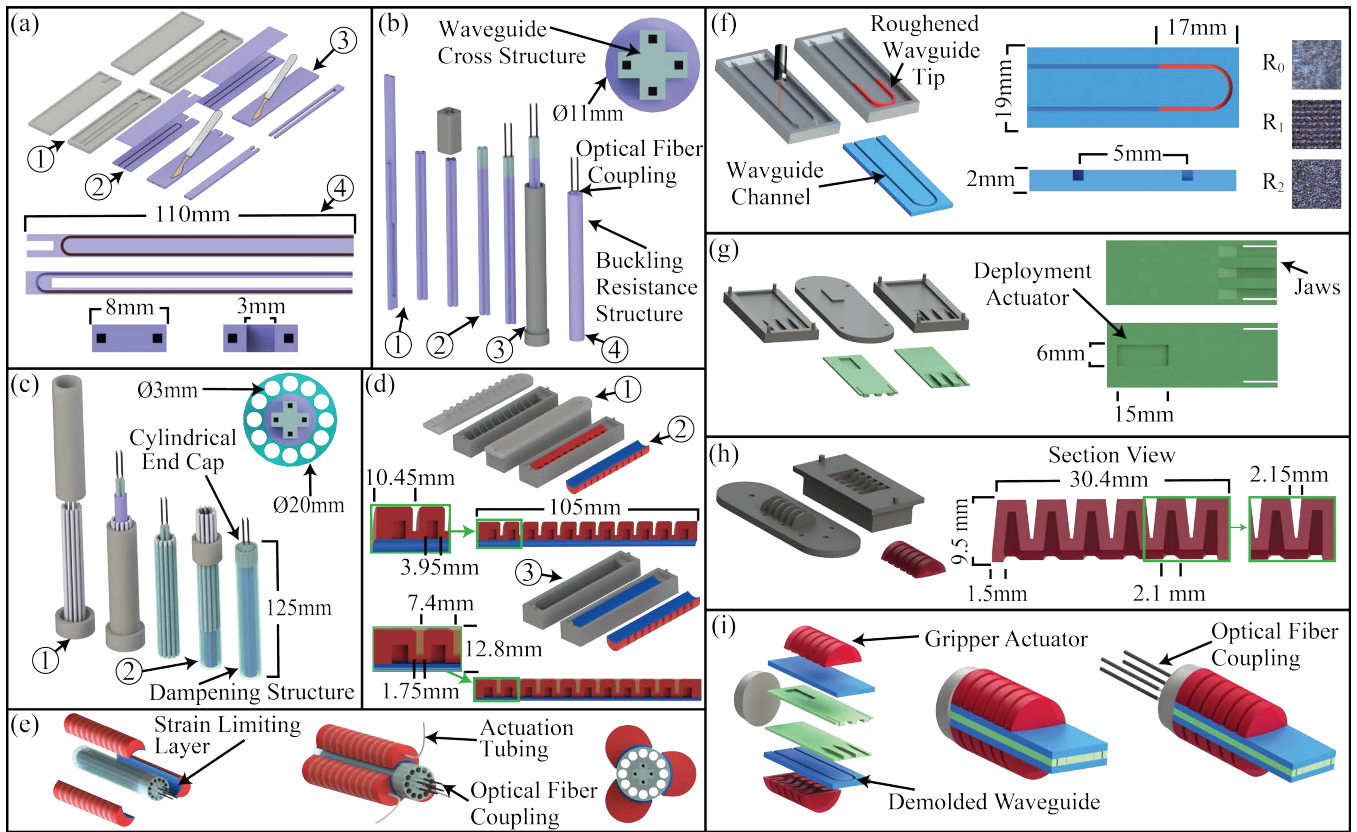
Soft robot fabrication. Robot module fabrication (a-e) and gripper fabrication (f-i). a) WGs embedded in the cross structure of the robot module. b) Cross structure assembly and molding into a cylindrical shape. c) Dampening structure around the sensing core. d) Pneumatic actuators molding. e) 120° spaced actuators placed on the dampening structure. f) Roughness tuned molds and microscope images of the surface roughnesses. g) Molds for the deployment actuation channel and the gripper jaws. h) Molds for gripper bending actuators. i) Gripper assembly.
